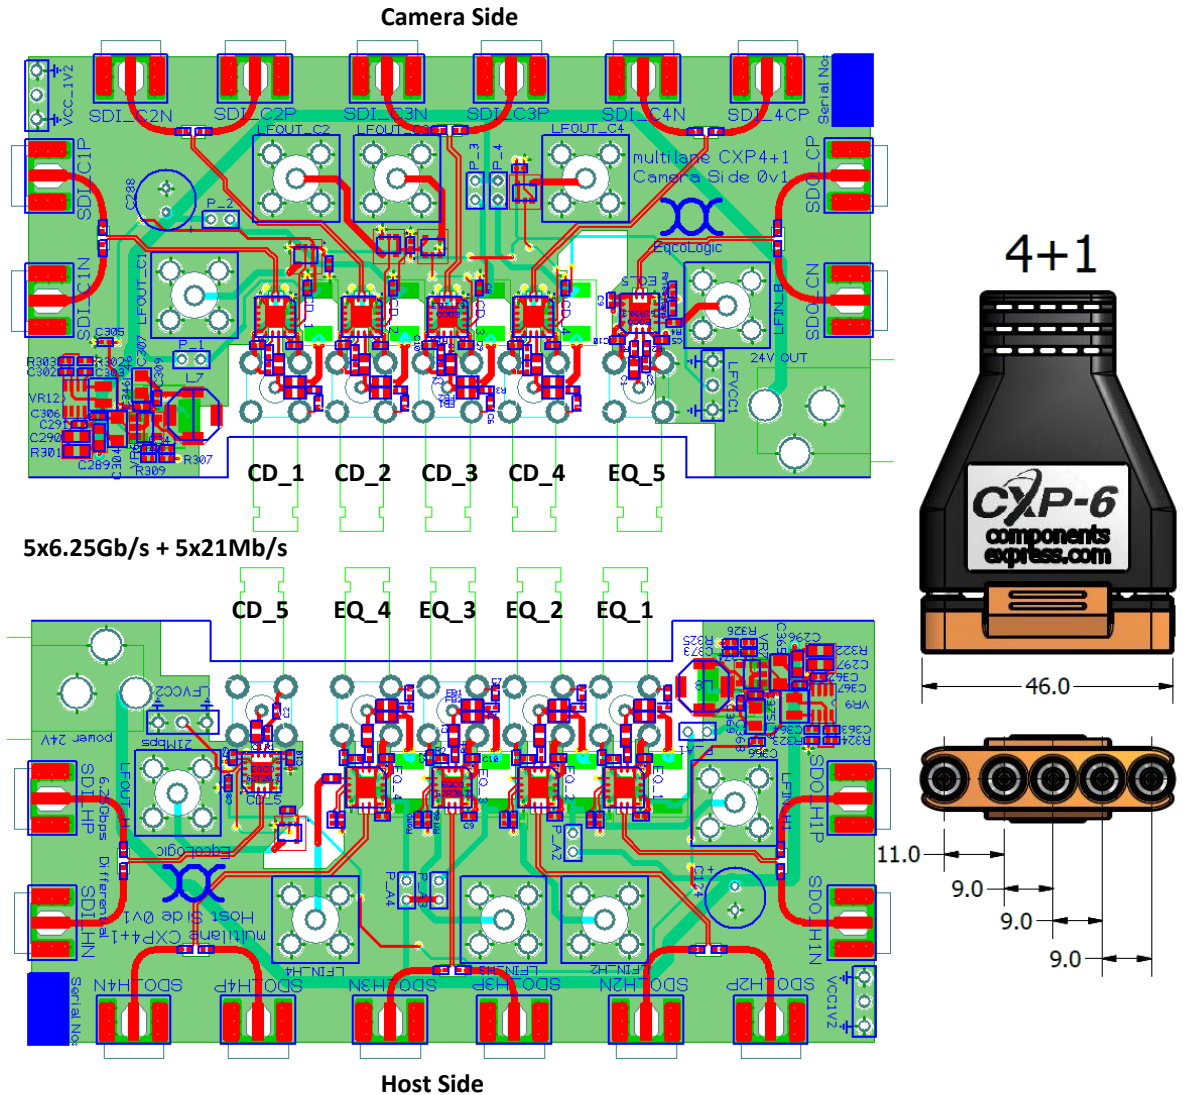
PCB layout of Multilane CoaXPRESS 0v1 demo board pair
